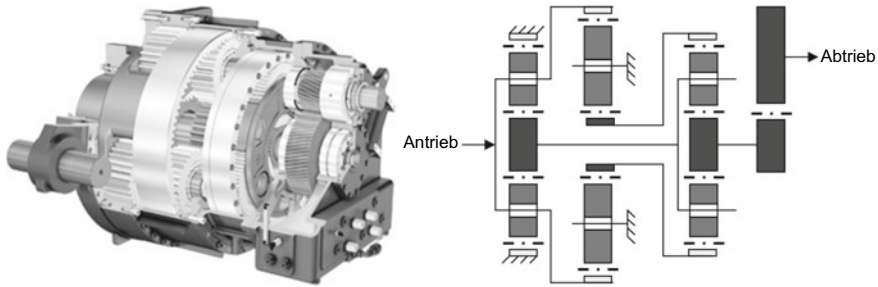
Gearbox with power splitter [ZF Industrieantriebe Witten GmbH]
